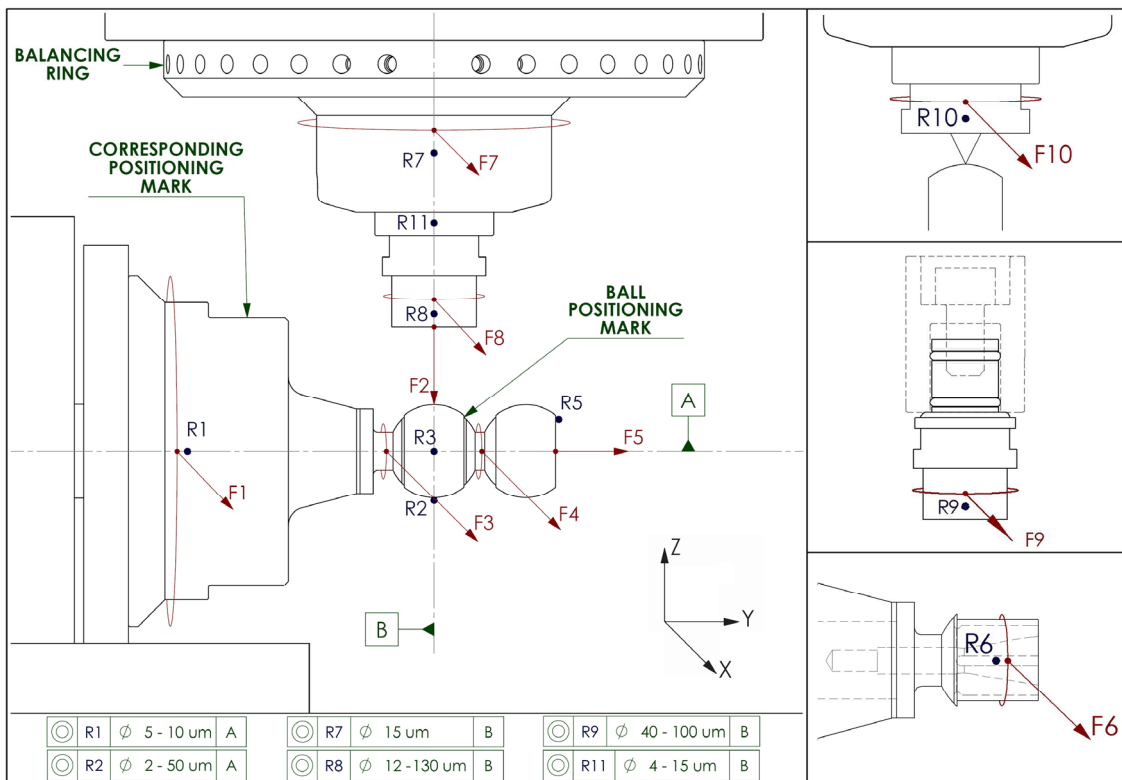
Locations of stiffness measurements taken on ball and wheel spindles and fixturing
